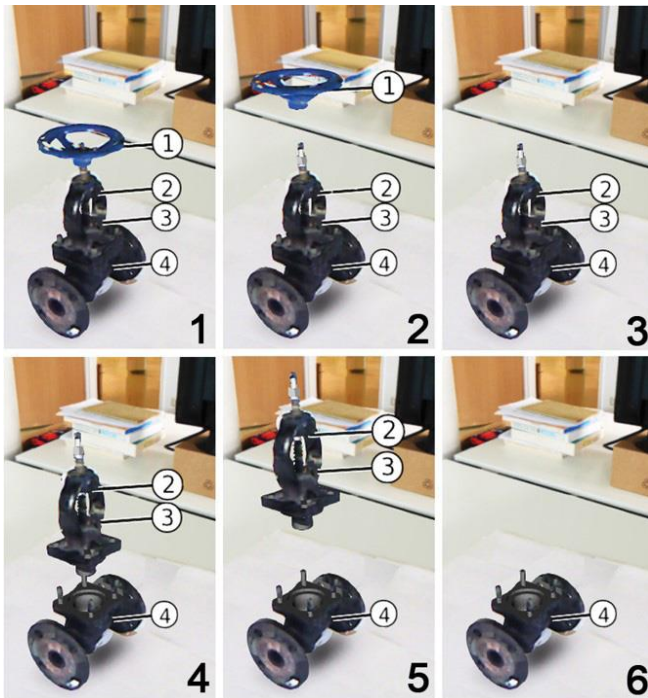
Disassembly sequence of a valve. Courtesy of Peter Mohr [21]
